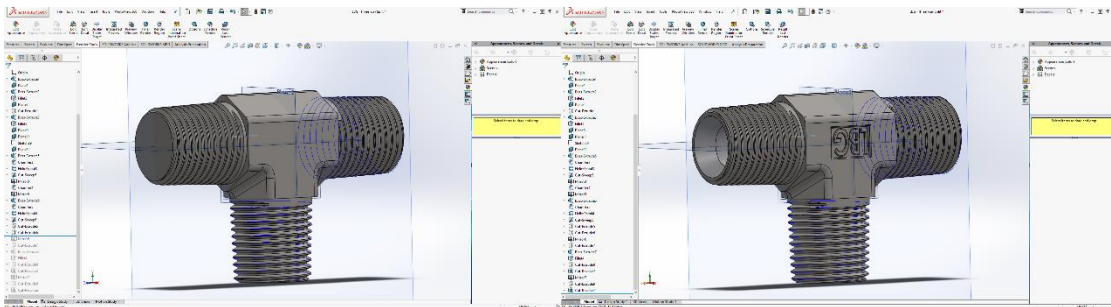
AAA080808: CAD Drawing (Stages 3 & 4)
